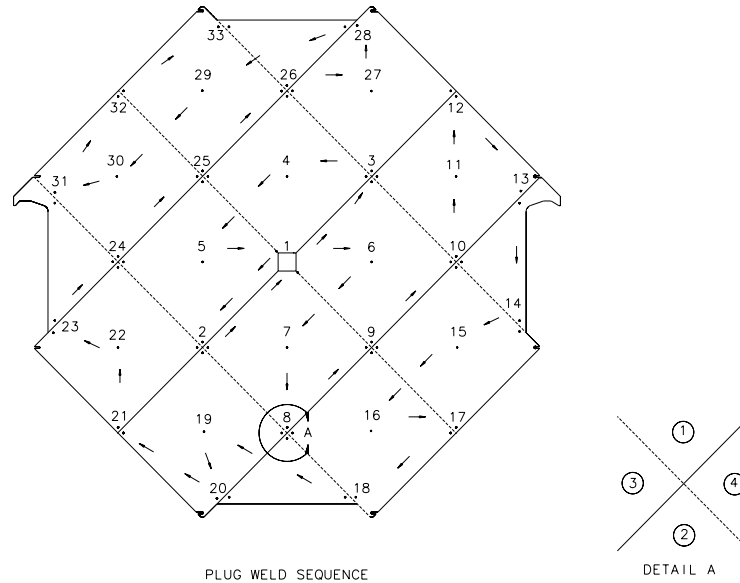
Sequence of plug welding operations to assemble an 8-m wide, 1-inch thick octagonal steel plane from eight 2-m wide, 0.5-inch thick plates.
